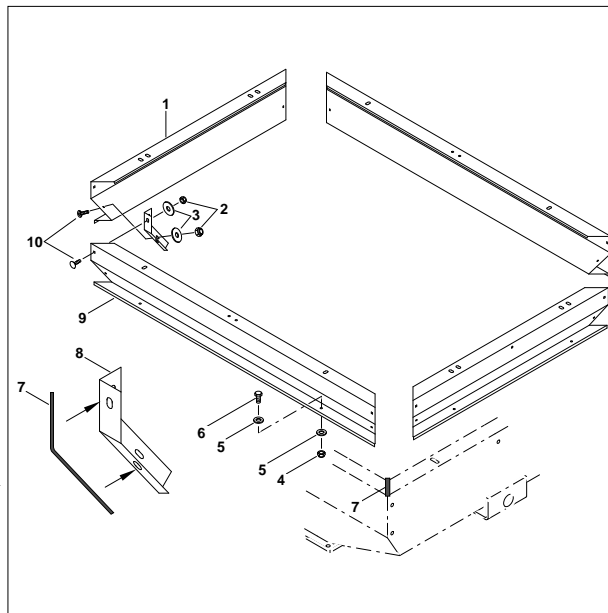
Mounting hopper extension for 750 litre seed hoppers
